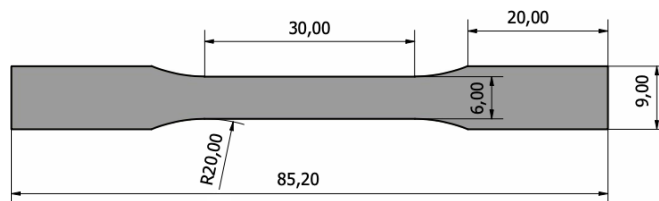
Geometry of the machined specimen for tensile testing. All measurements are given in mm.
